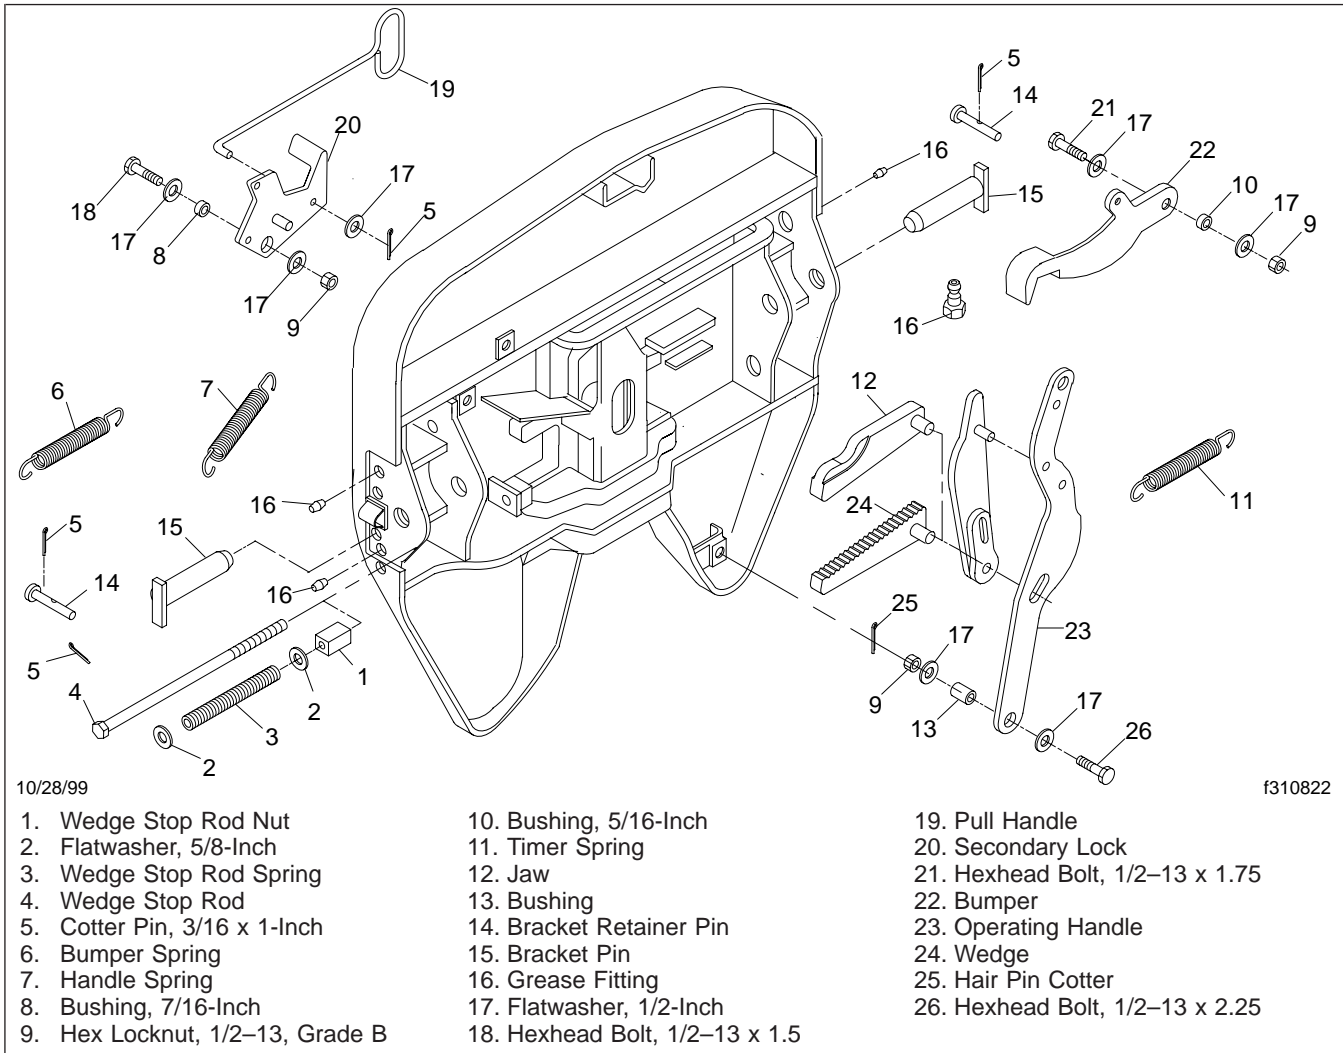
, Fontaine 6A36 Fifth Wheel (left-side release shown)
